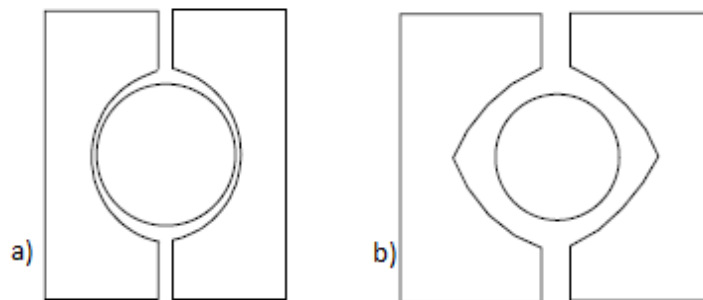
a) Deep groove ball bearing b) 4-Point contact ball bearing [6]
